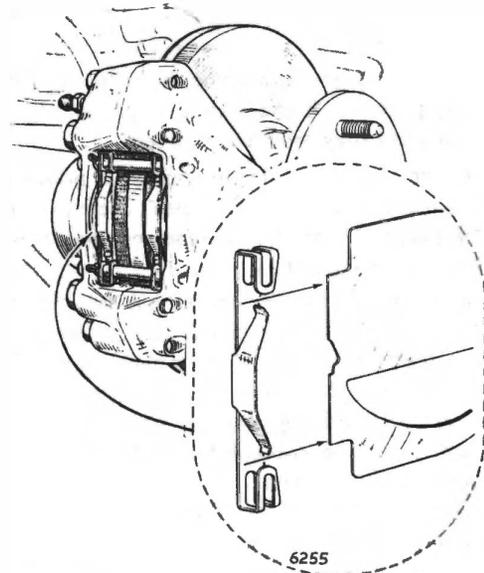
Series I and II models. The illustration shows the pad retaining pins passing through the slotted ends of the anti-rattle springs and the tongues bearing against the pad backing plates. The inset shows the outward end of the anti-squeal shim cut off to accommodate the anti-rattle spring, when both are fitted to the same caliper.
